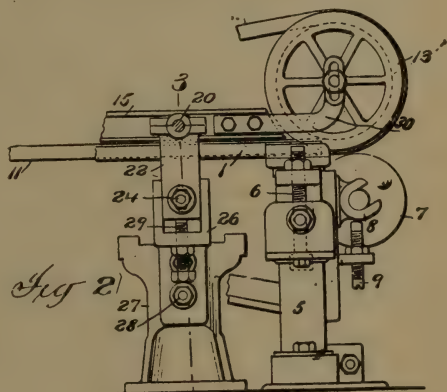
is a side elevation of a paper making machine of the Fourdrinier type, embodying the invention. Fig. 2 is an enlarged detail elevation of the right hand end of the machine shown in Fig. 1. Fig. 3 is a sectional elevation on the line 3 3 of Fig. 2. Figs. 4, 5, 6 and 7 are detail views. Referring to the drawings, No. 1, in Fig. 1, indicates the shaking section, the side rails of which serve to support the usual table rolls 2. While the shaking section may be mounted and operated in any desired manner, it will preferably be supported in the manner set forth in a previous patent by the same inventor, that is to say, the ends of the side rails nearest the couch rolls are pivotally connected
